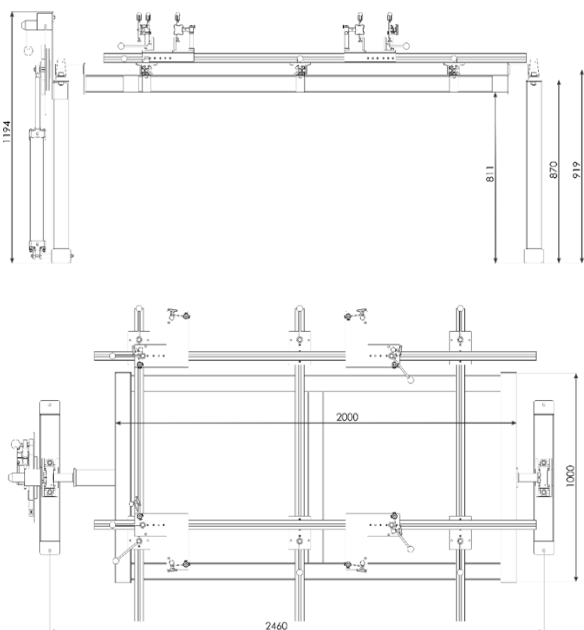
General Dimensions of the Rotating Welding Table
